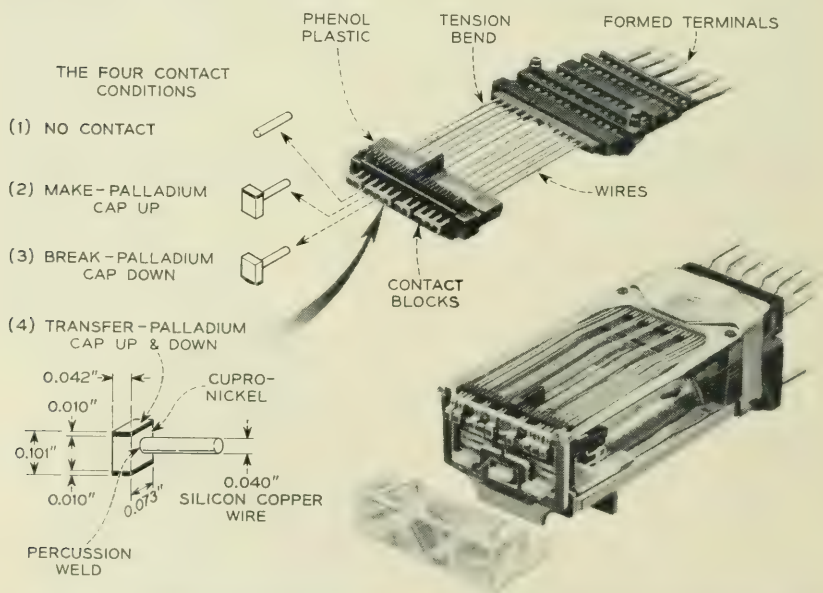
Single-wire comb with percussion welded contacts. Also view of wire spring relay.
